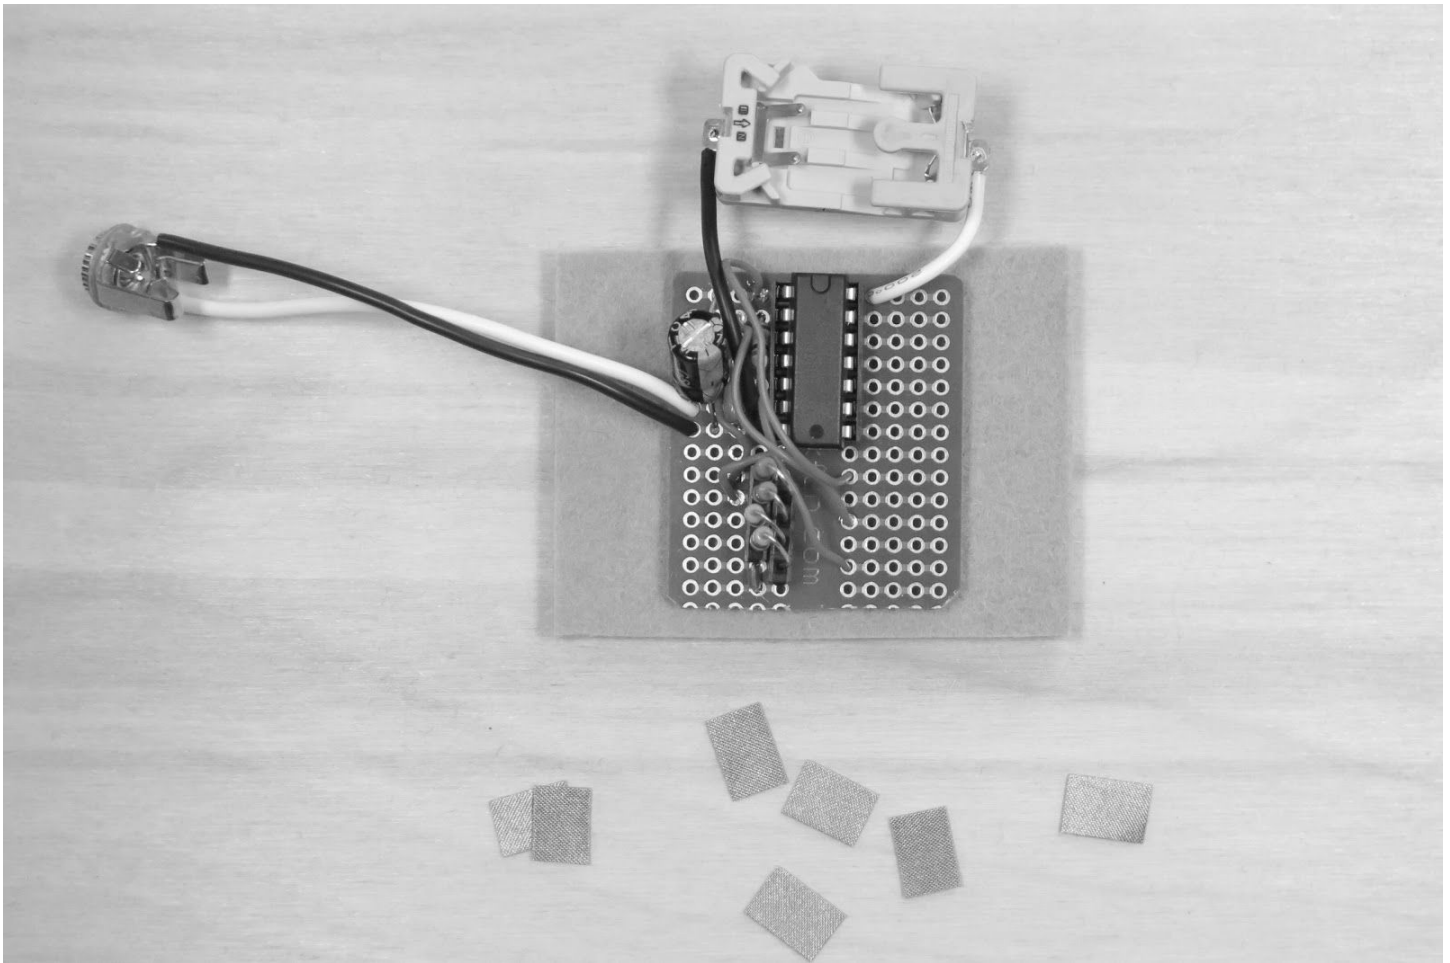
Cut felt and conductive pads with finished protoboard circuit
